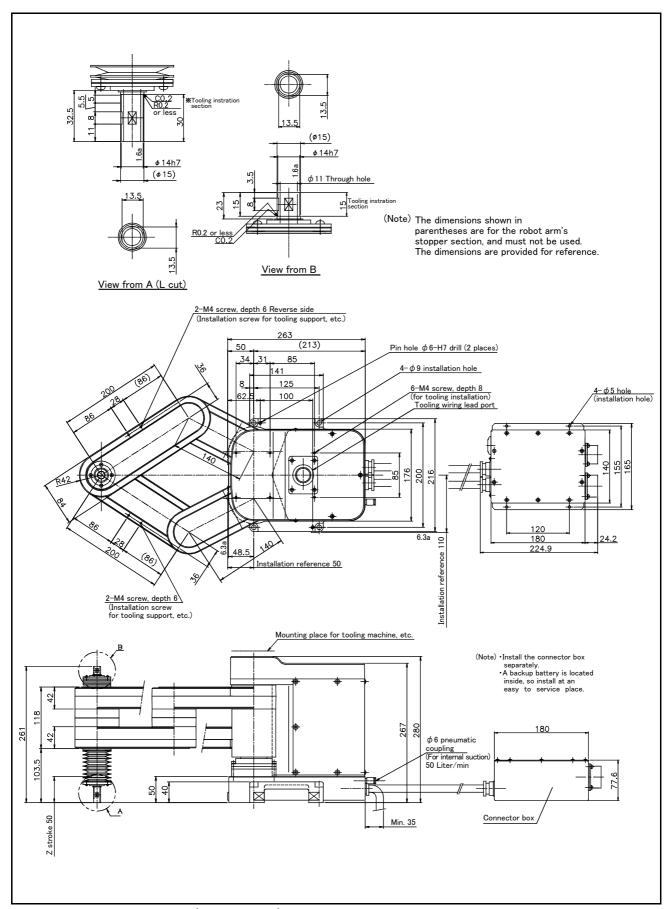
Outside dimensions (RP-3AHC-SB)
